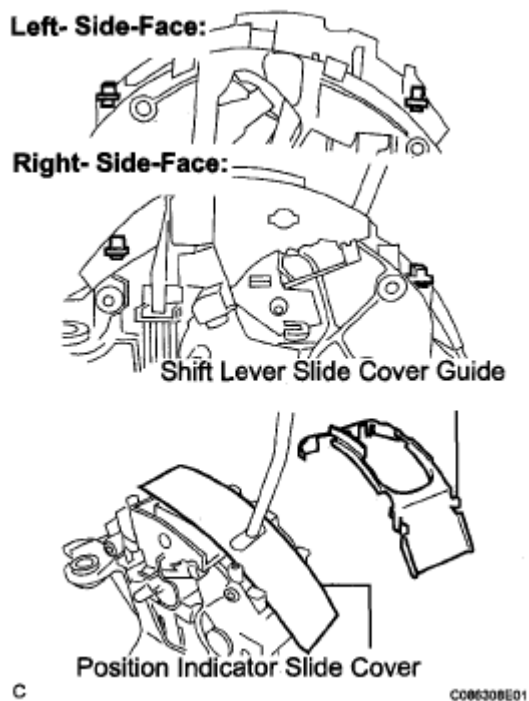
Identifying Shift Lever Slide Cover Guide And Position Indicator Slide Cover
